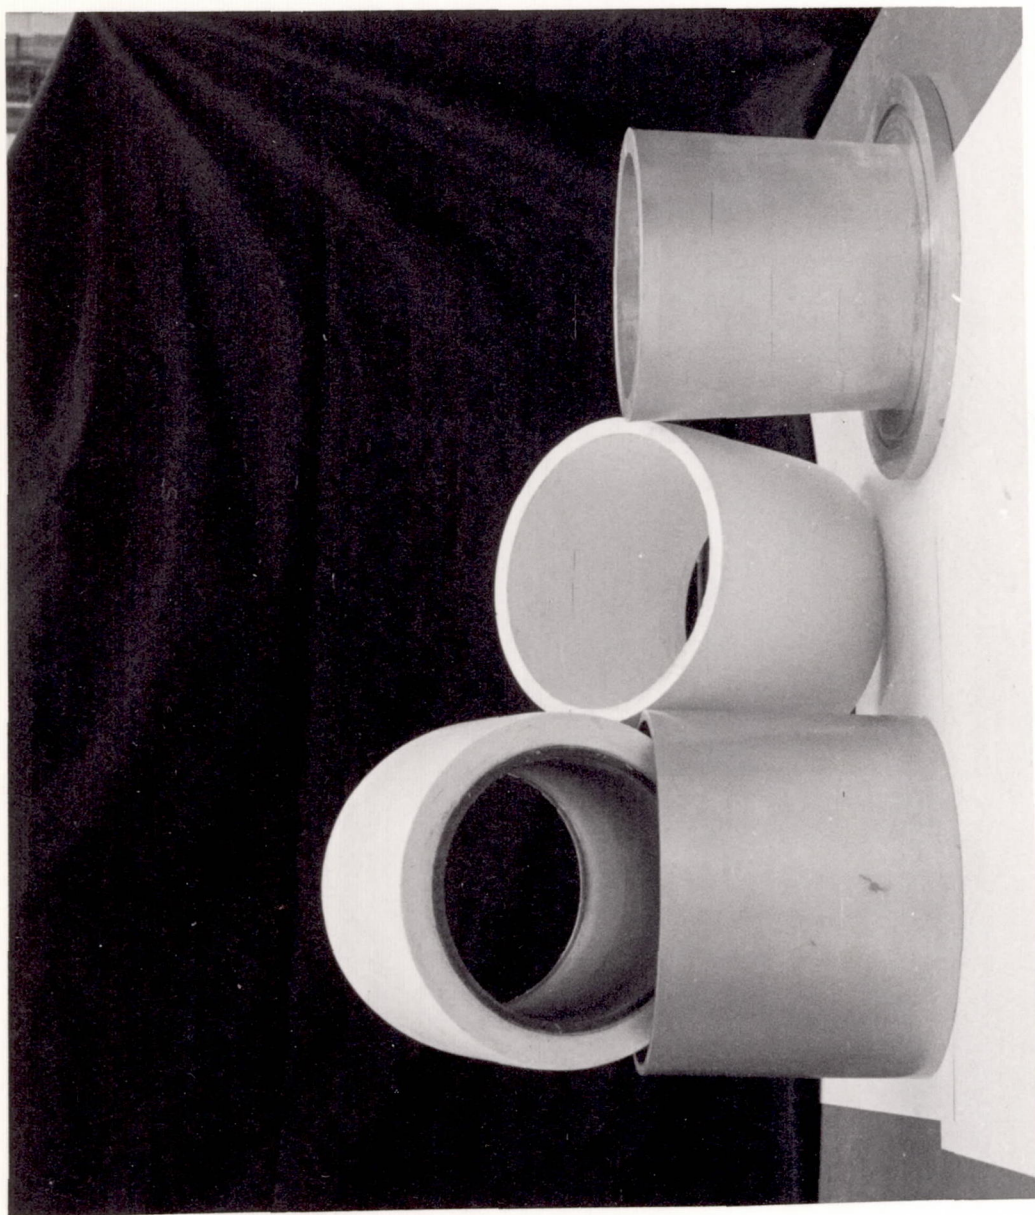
CASTING MOLD FOR FLEXIBLE SLEEVE
